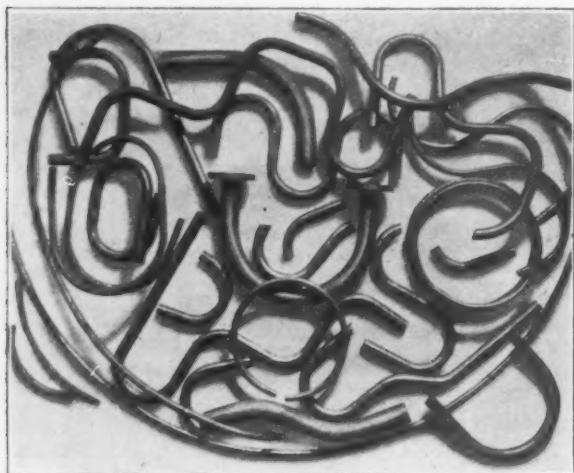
Examples of Pipe and Tube Bends Made on Cox Machines.
